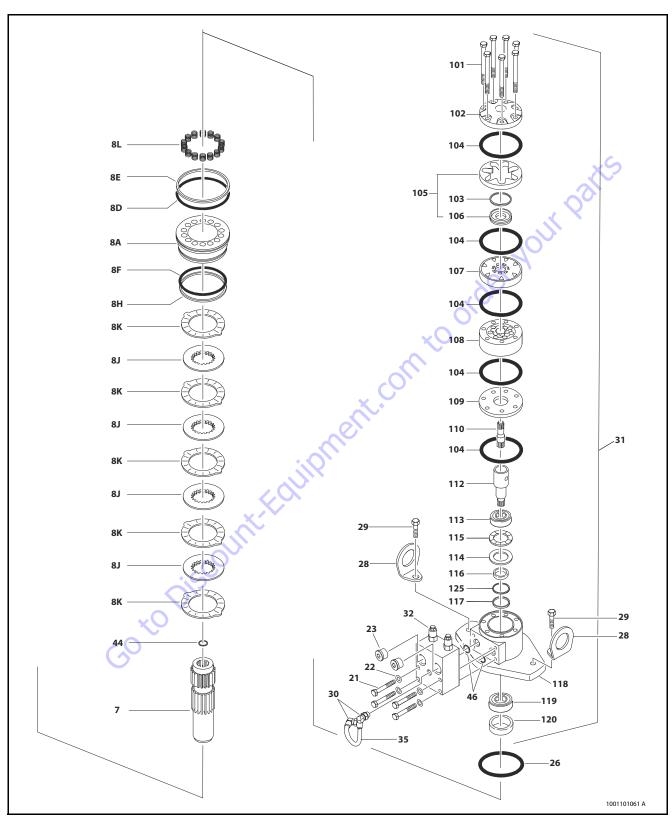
Swing Motor/Brake/Hub Assembly (USA Built Machines, SN 0300137441 through 0300171769 and China Built Machines, SN B300000100 through B300000969) - Sheet 2 of 3
